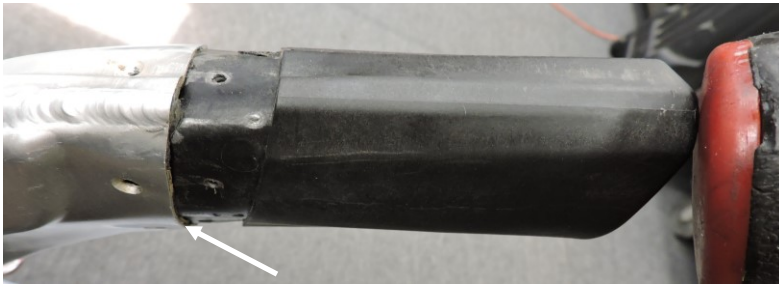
Re-installation of end cap beginning with lower edge identified by white arrow.
